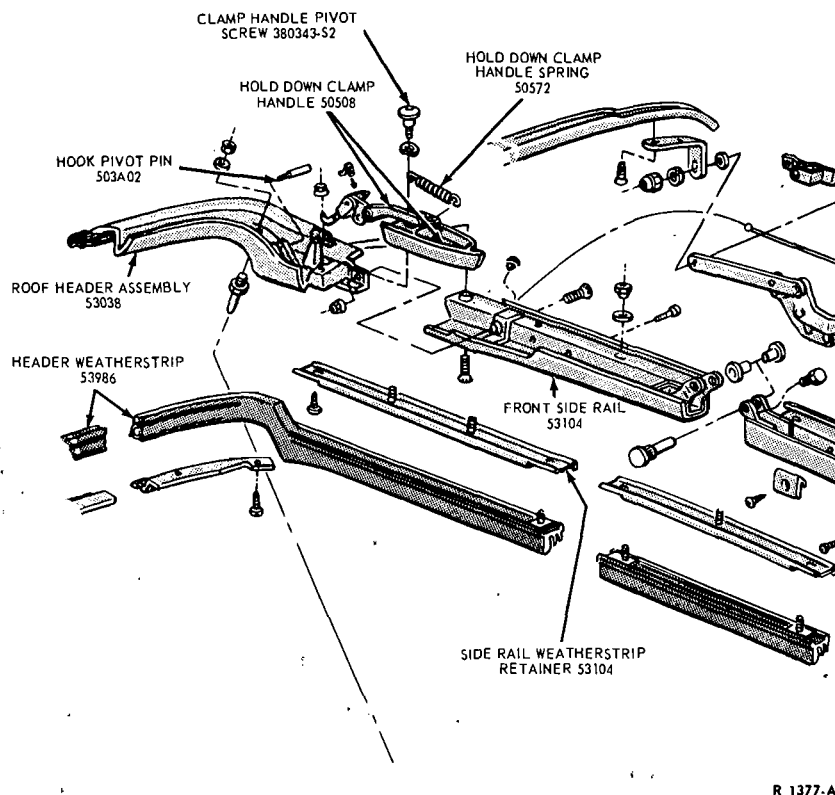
Folding Top Hold Down Clamp—Fairlane, Mercury Intermediate
